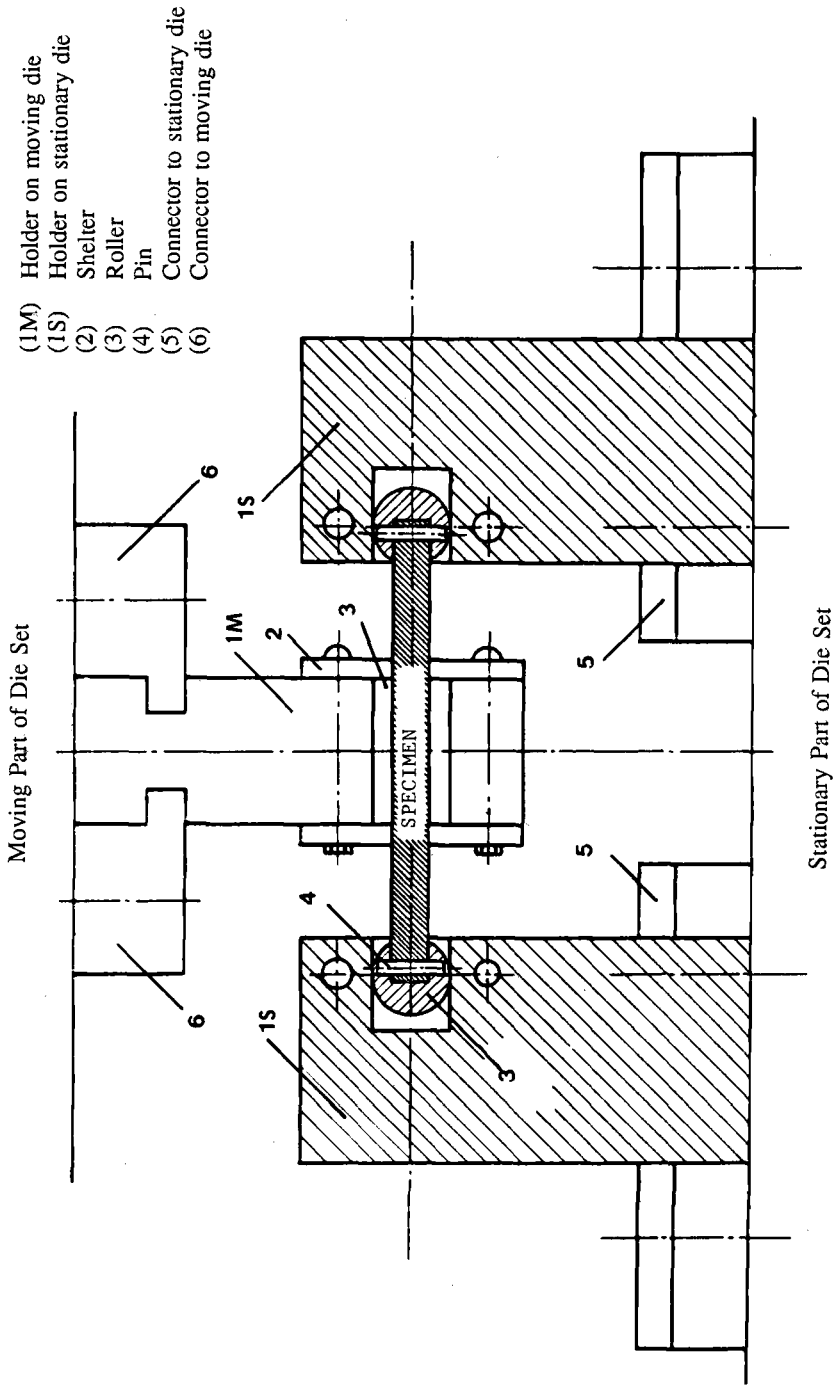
Schematic of anticlastic bending loading apparatus identifying all major components.
